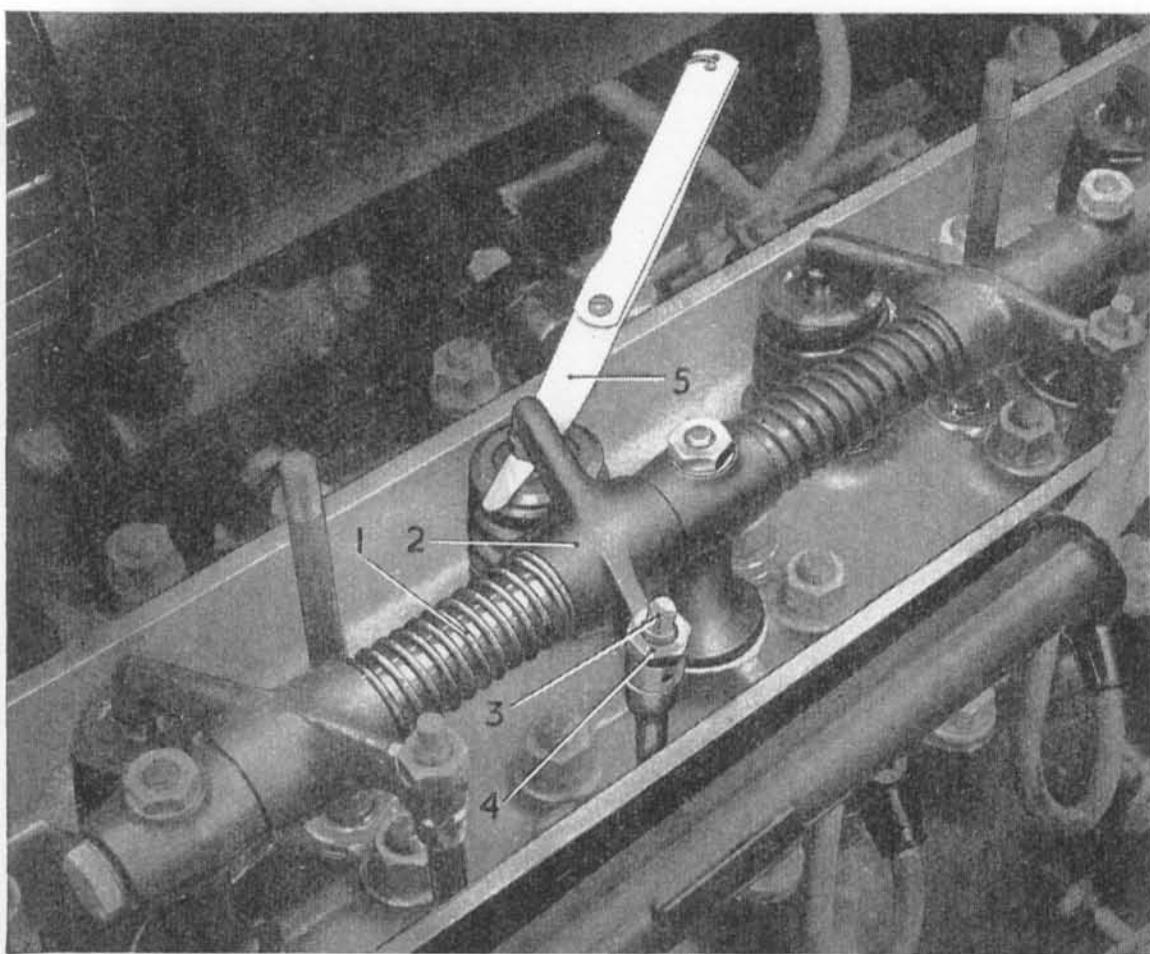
ADJUSTING THE INLET VALVE ROCKER CLEARANCES.
